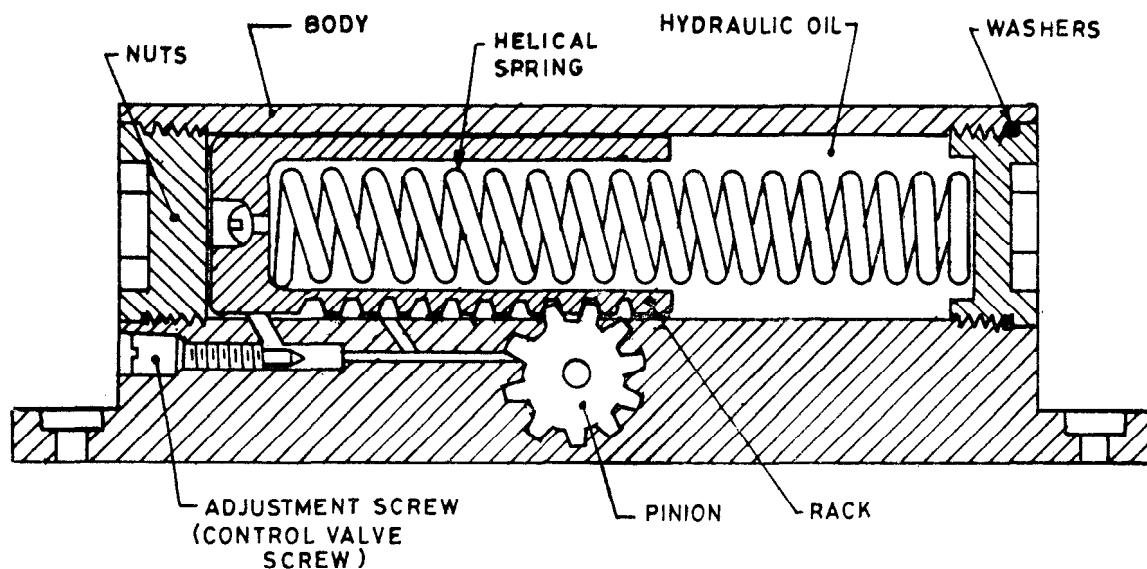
TYPICAL SKETCH OF HYDRAULIC DOOR CLOSER (TUBULAR) SHOWING MAIN COMPONENTS
